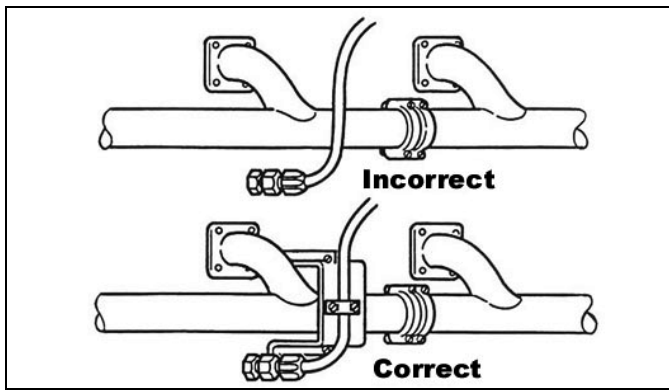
Provide shields/guards to protect hose/tube assemblies from potential damage. Examples include; heat sources such as exhaust manifolds/mufflers, abrasion/rubbing contact, contact with external objects.
